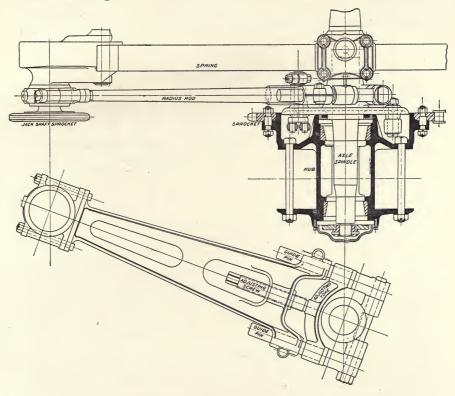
Vulcan Radius Rod with Adjustment at Rear End.
